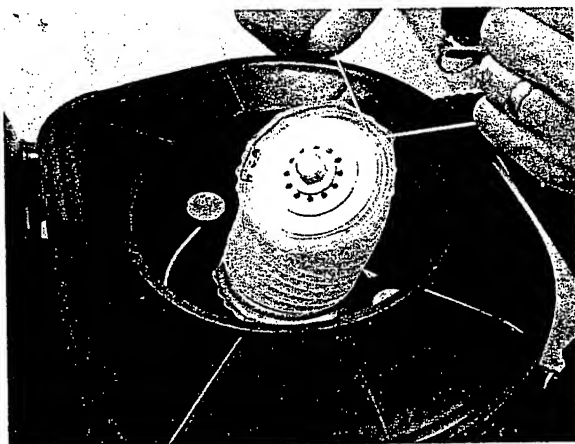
Assembling a smaller inner exhaust bellows to give a reduced EVR.
